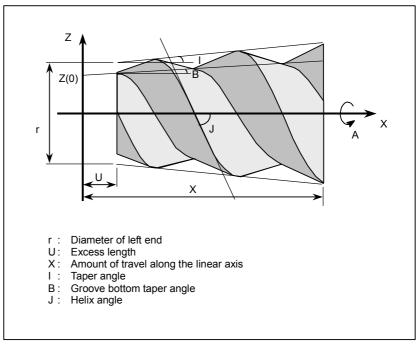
(b) Constant helix machining for producing a tapered figure
